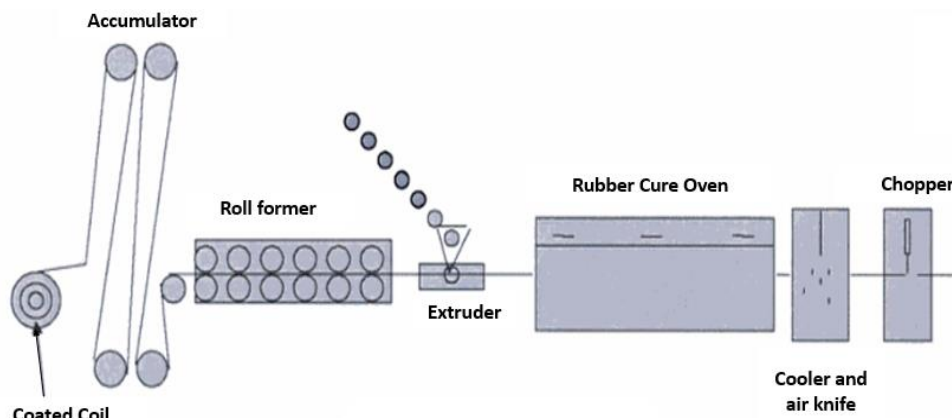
Schematic display of the roll forming and extrusion line [27].
